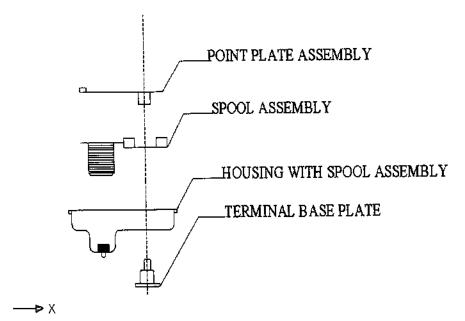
EXPLODED SPOOL LOCKING SEQUENCE
